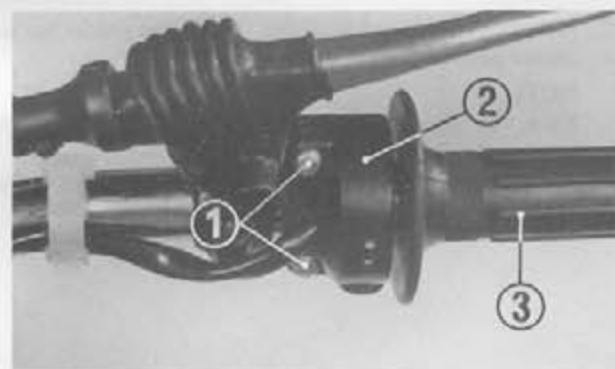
(1) Screw (2) Headlight switch housing (3) Grip
